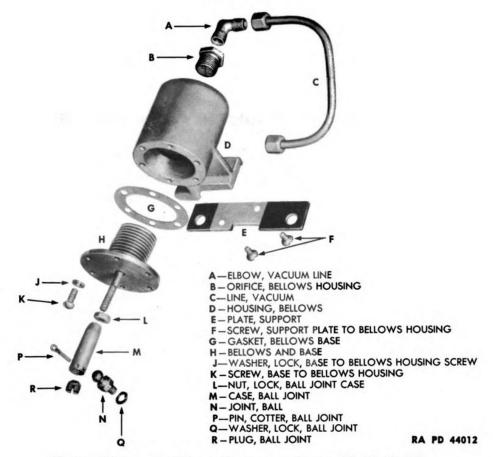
Auxiliary Governor Assembly Unit M6 — Exploded View
